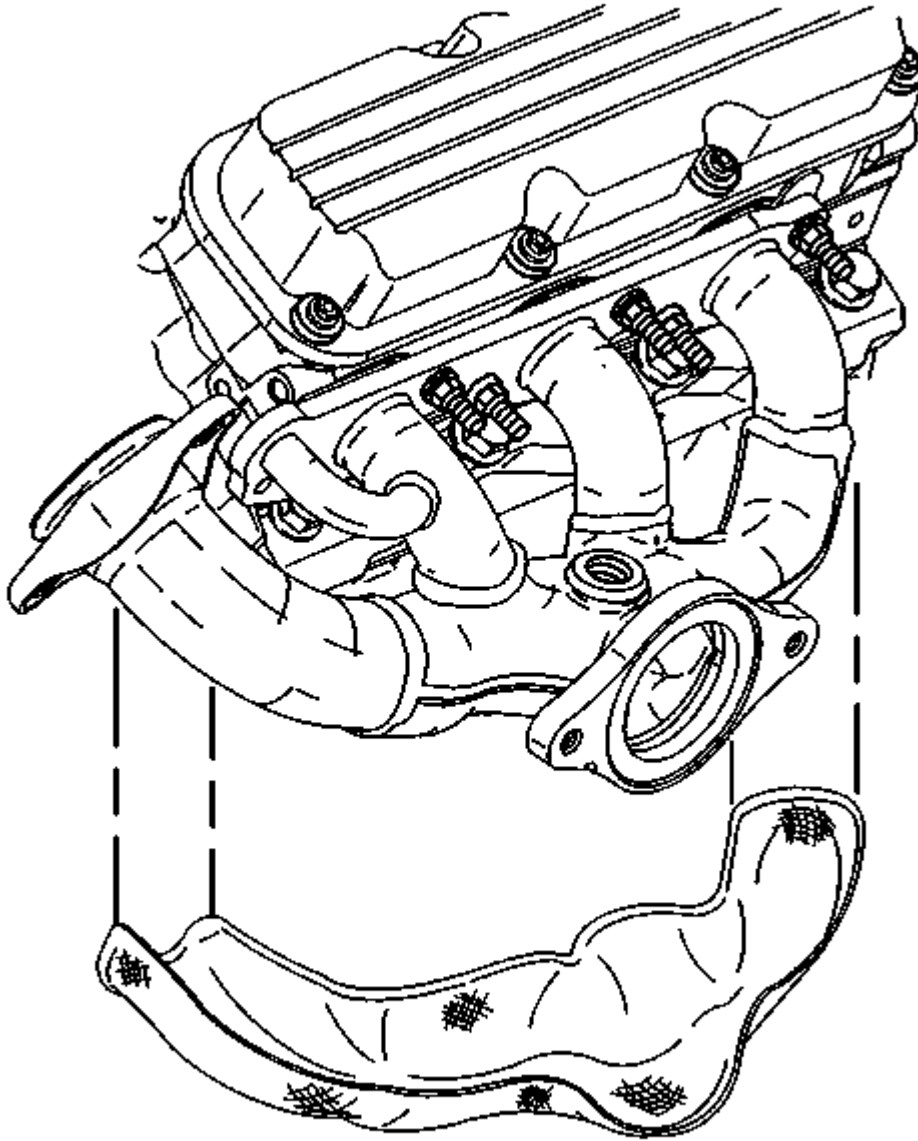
Removing Lower Right Exhaust Manifold Heat Shield
